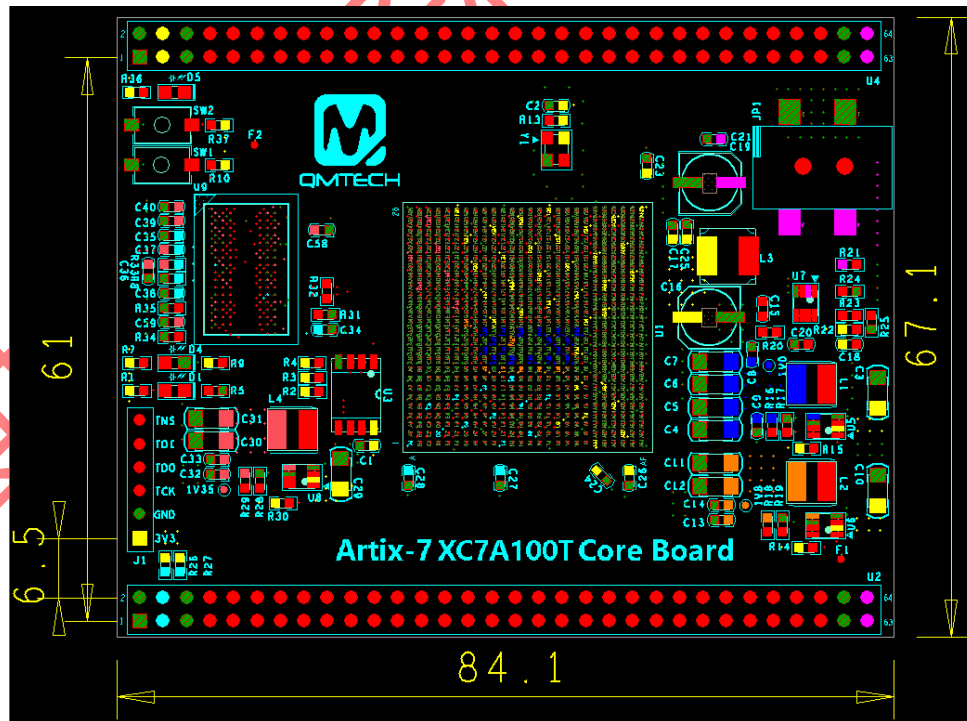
QMTECH XC7A100T Core Board Dimension
